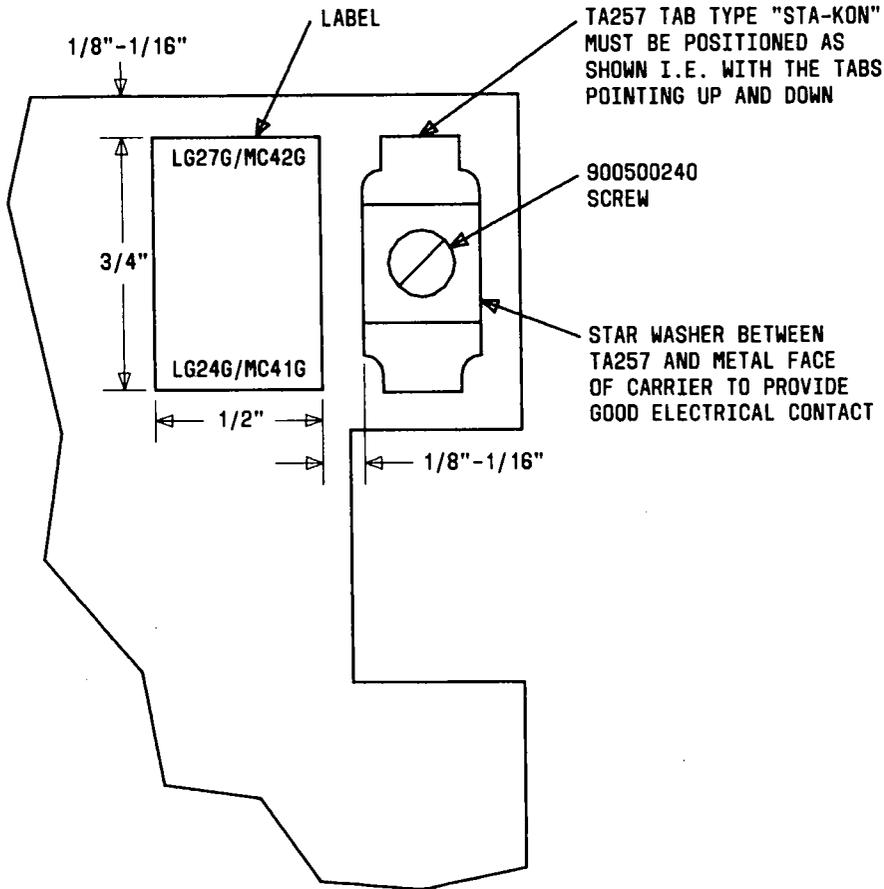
Pigtail Connection to Carrier (Triaxial Cable)
